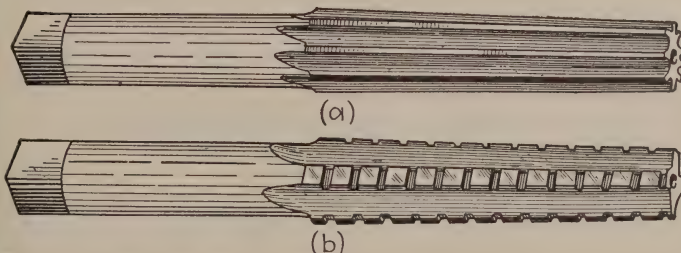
Hand reamers for taper holes. (a) Finishing; (b) roughing.
